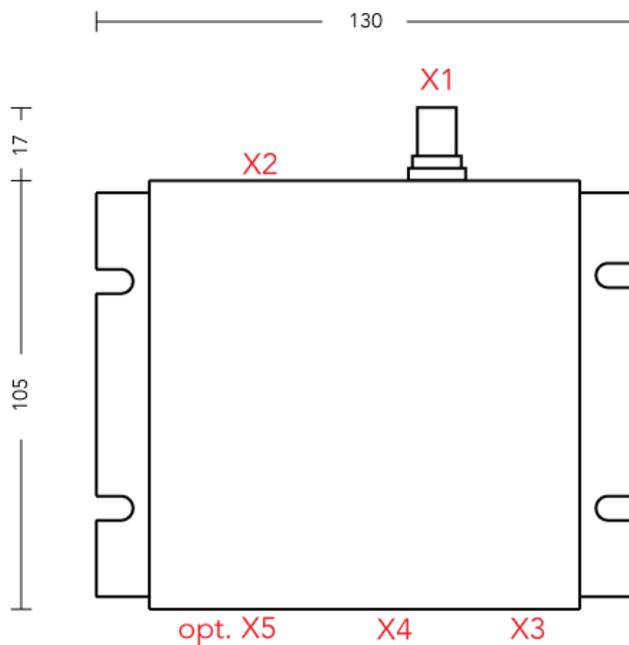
Dimensions of QuasarMR1 RFID Reader (in mm)
